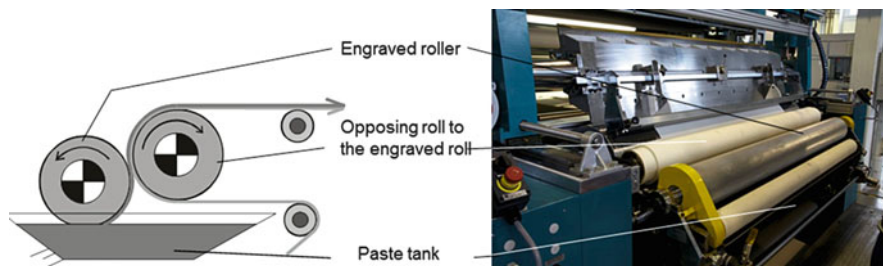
Coating machine (Source: Coatema Coating Machinery GmbH)
